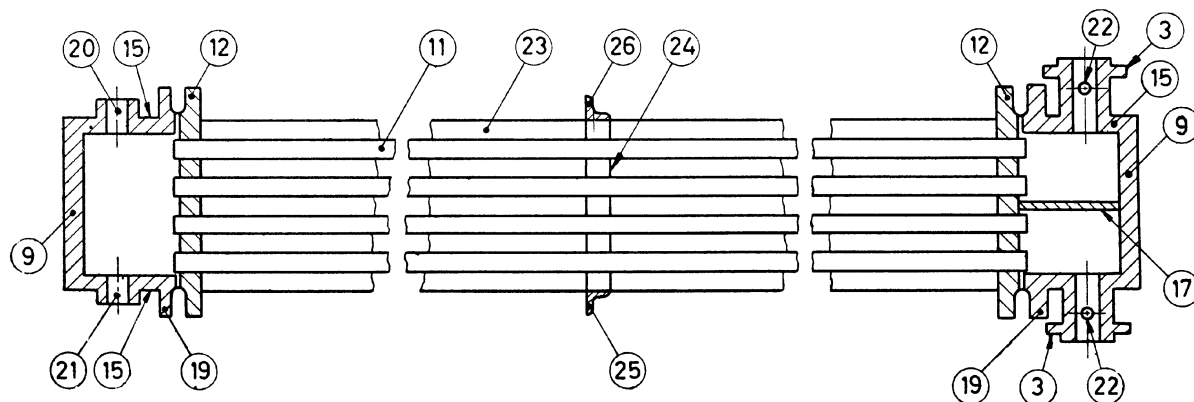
TYPICAL CONSTRUCTION OF A TUBE BUNDLE WITH REMOVABLE-BONNET HEADERS
